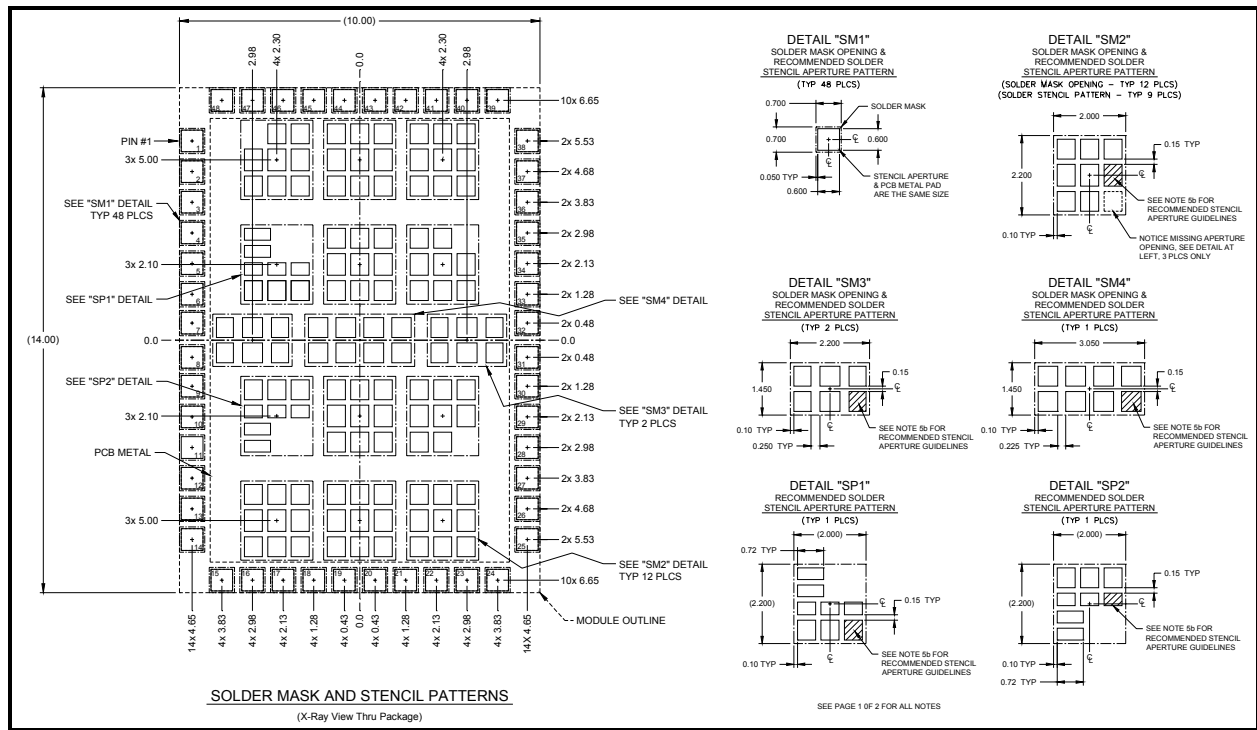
Recommended PCB Footprint – Solder Mask and Stencil Patterns (173-DWG-10, Rev 1.0)
